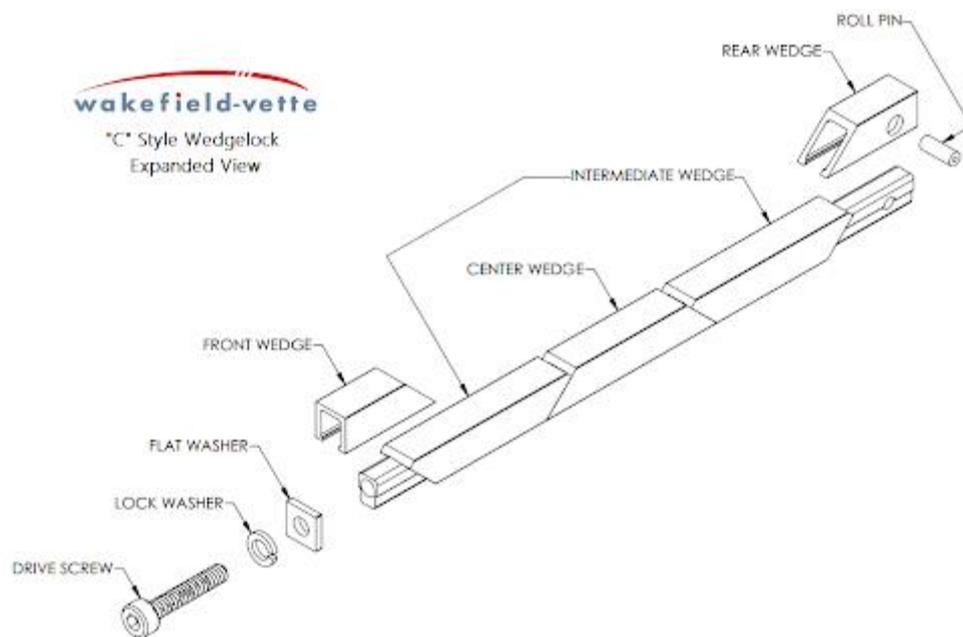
EXPANDED VIEW OF A TYPICAL 5 WEDGE WEDGELOCK [1]
